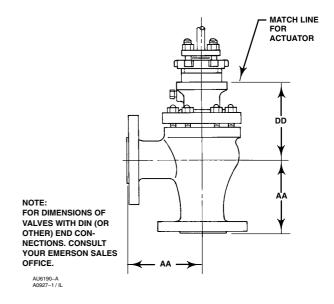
Design EAD Dimensions (also see tables 16 and 17)
